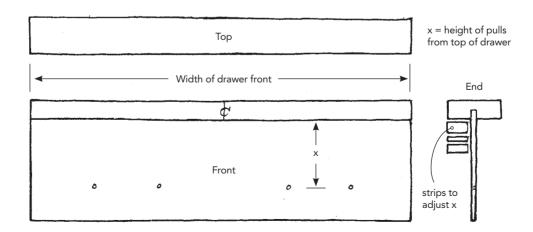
B: Drawer-pull centering positioner (dimensions, showing extra lips)
